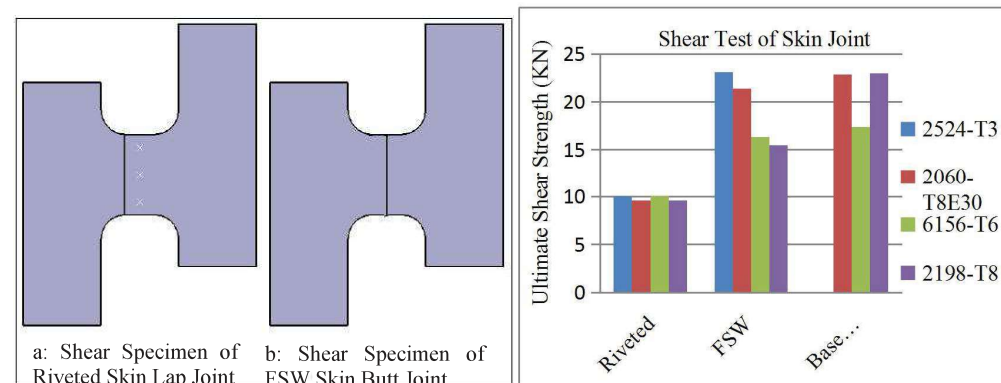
Shear Test Results of Riveted/Welded Skin Joint
